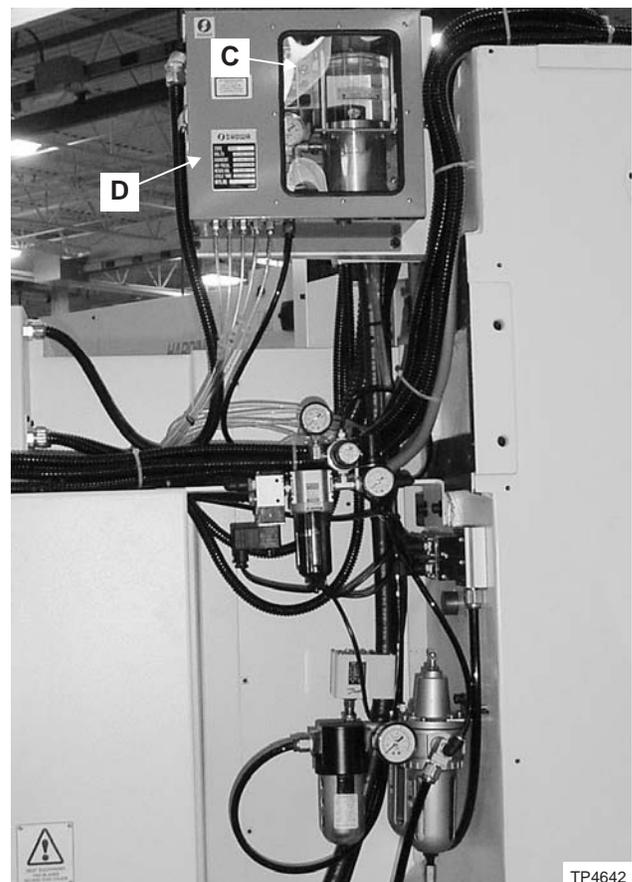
High-Speed Spindle Lubrication System - Air and Lubricator
